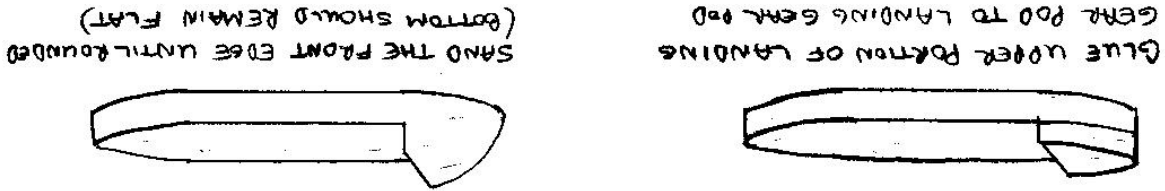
LANDING GEAR POD/WING ASSEMBLY
